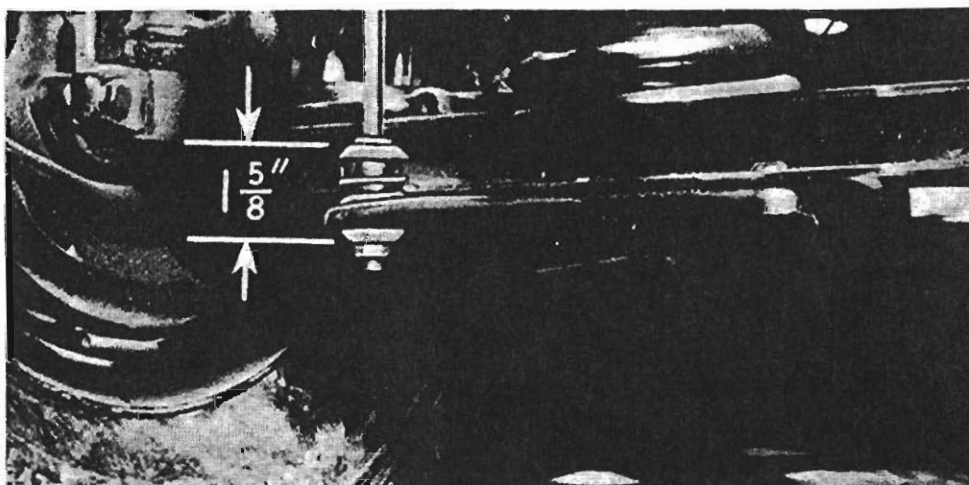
After Connecting Links to Support Arms, Tighten Retaining Nuts to Obtain Dimension Shown.
